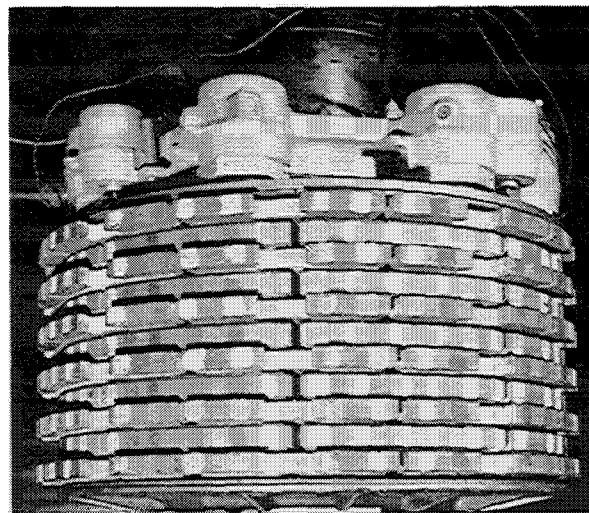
$17\frac{1}{8} \times 11\frac{3}{8}$, 6-rotor brake assembly with beryllium heat sink.
